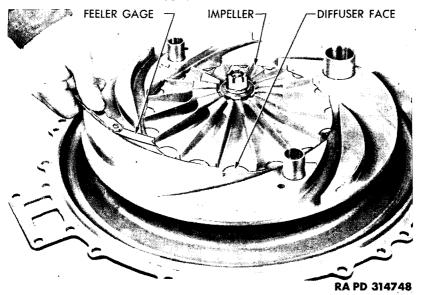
Checking Impeller End Play Using Gage 41-G-400
